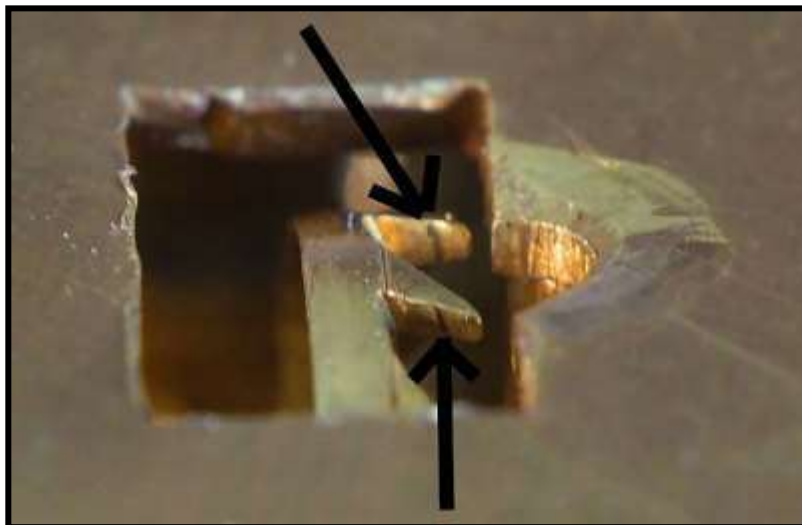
The notching of the impulse faces of the escape wheel could easily escape detection as one would not be looking for such a unique problem and cannot be seen without taking the balance cock off and removing the balance.
